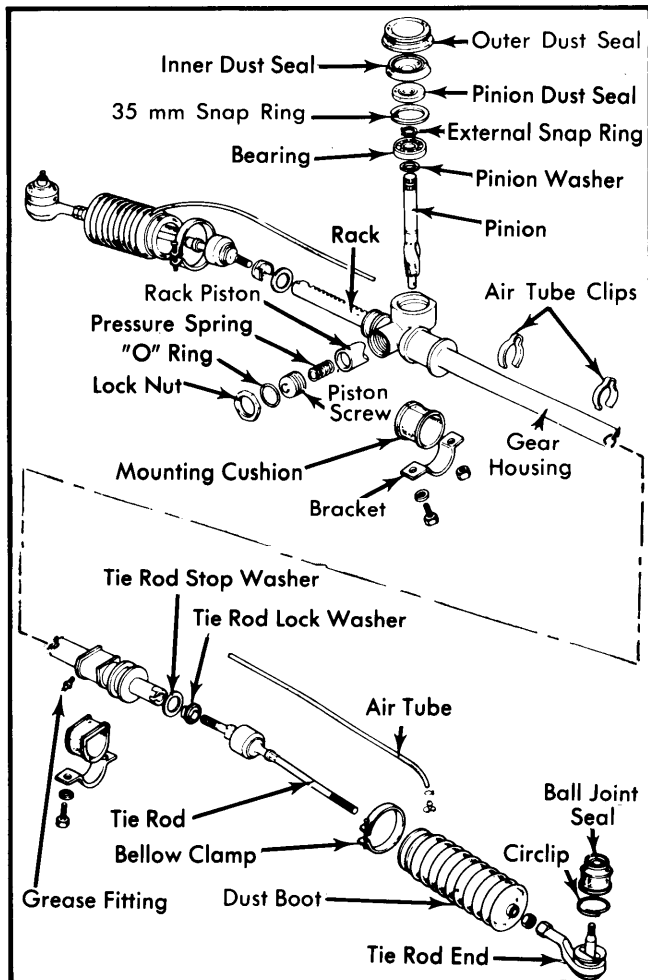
Exploded View of Honda Rack & Pinion Steering Gear Assembly
